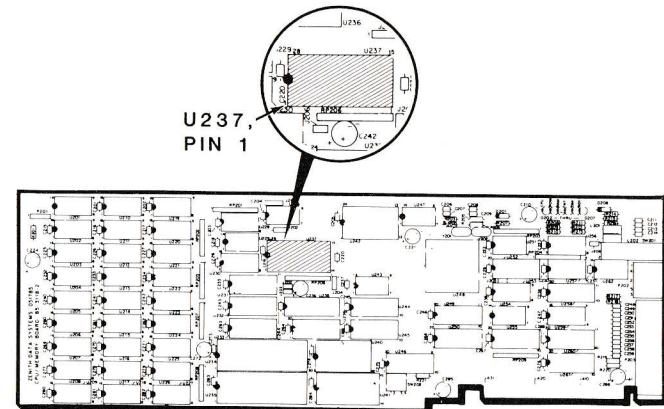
CPU/Memory Card (PCB Part No. 85-3118-XX)
